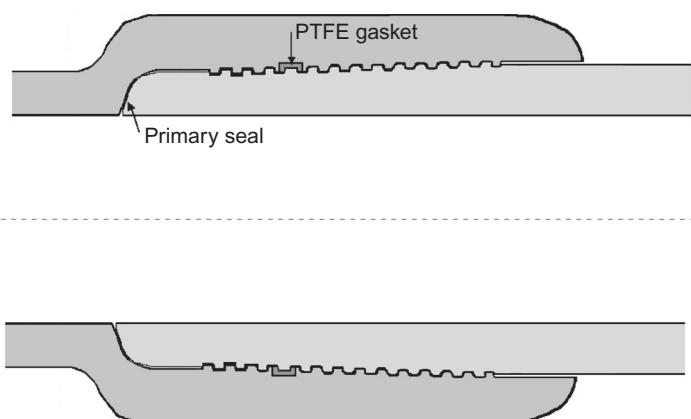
Cross-section of a pipeline with a threaded connection containing a PTFE gasket as a secondary seal.
